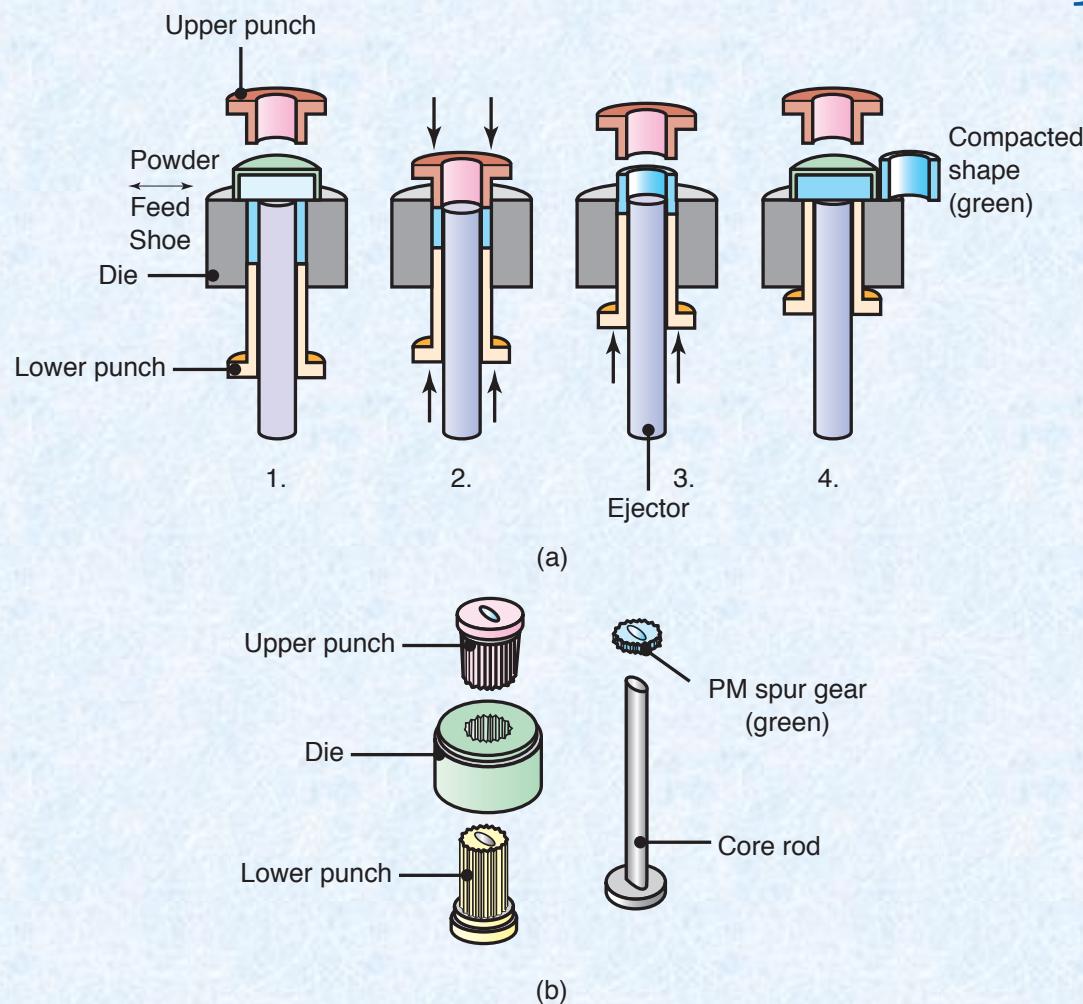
Production of gears through the powder compaction process. (a) Steps required to produce a part; (b) illustration of tooling required for a simple spur gear. *Source:* After Kalpakjian and Schmid [2010].
